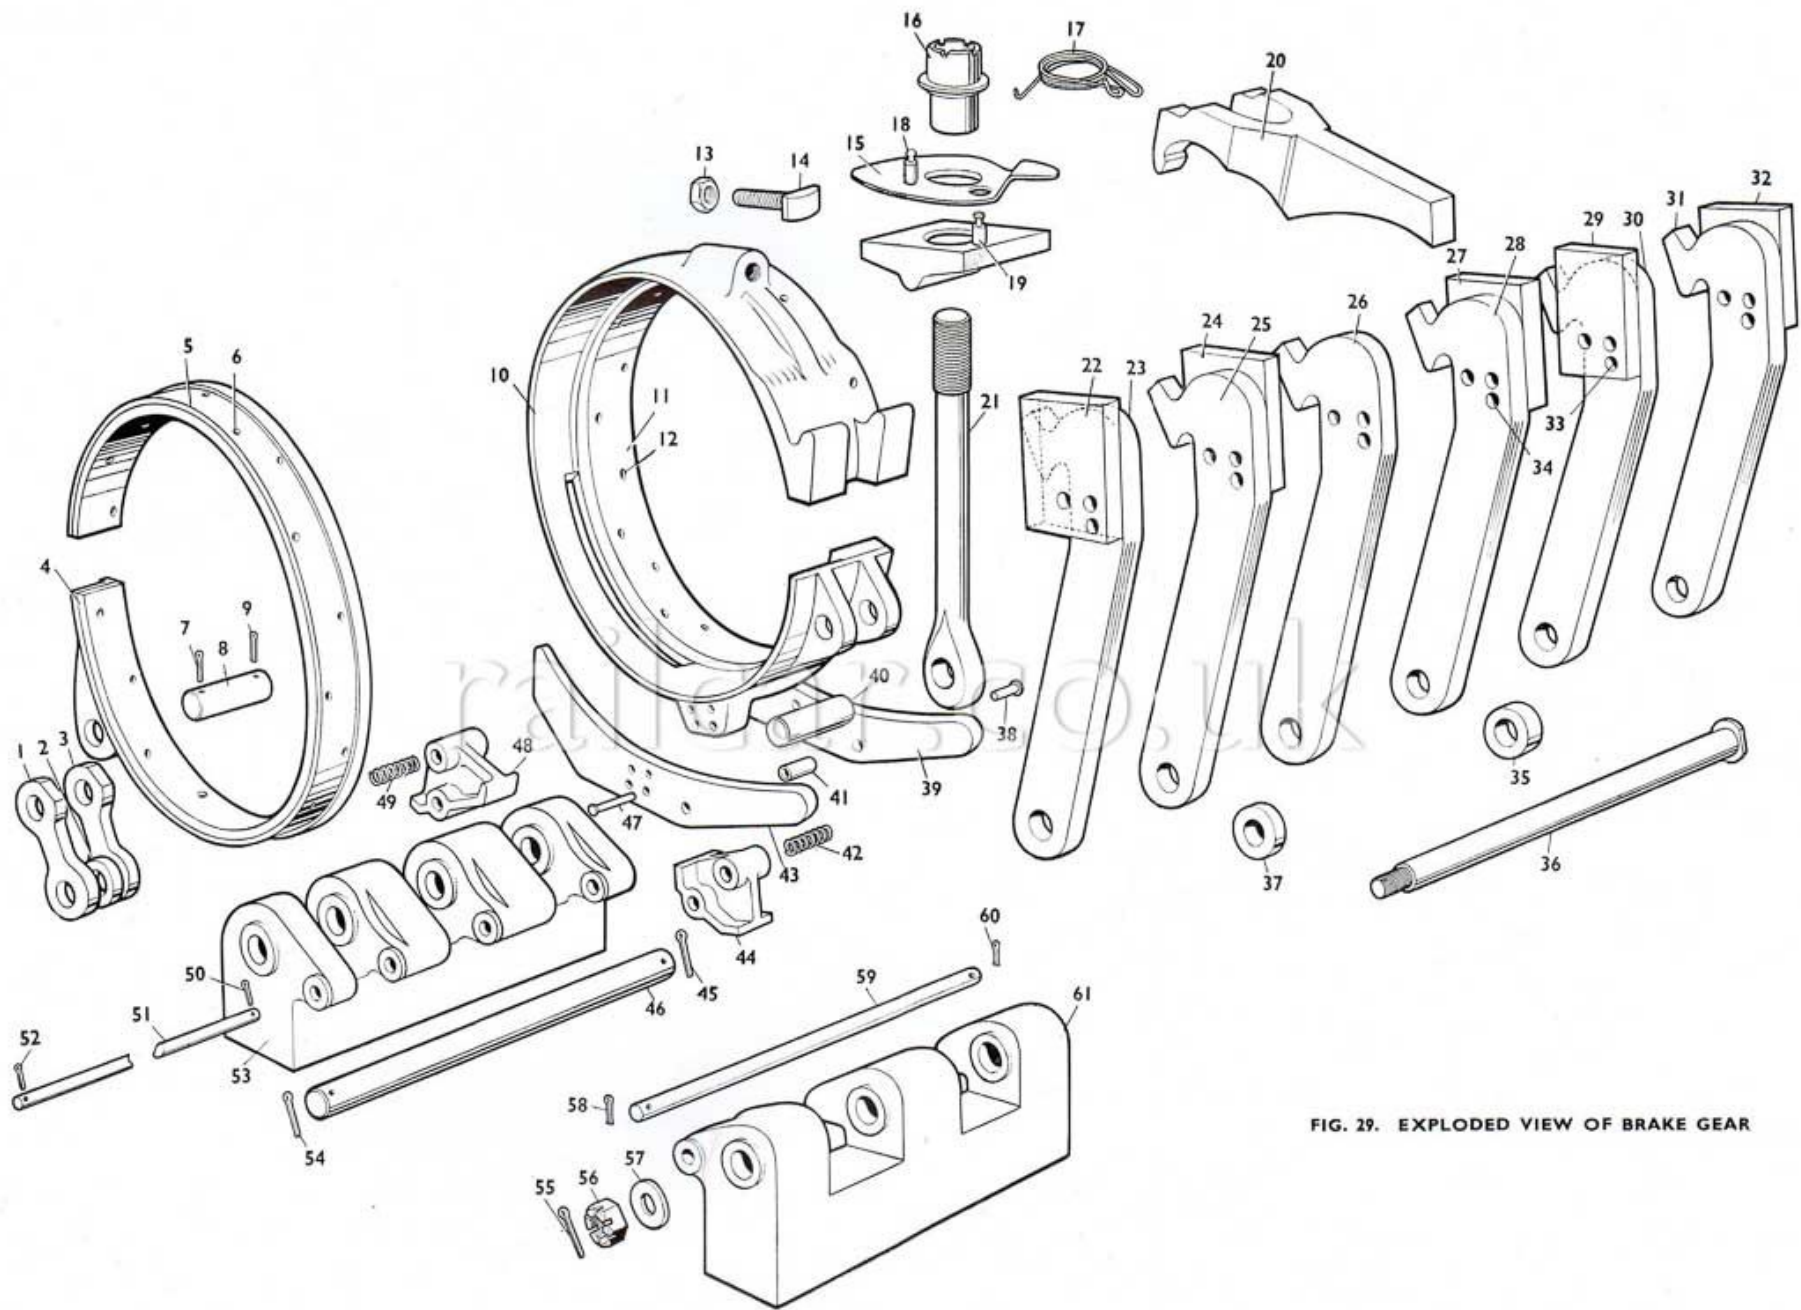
EXPLODED VIEW OF BRAKE GEAR
